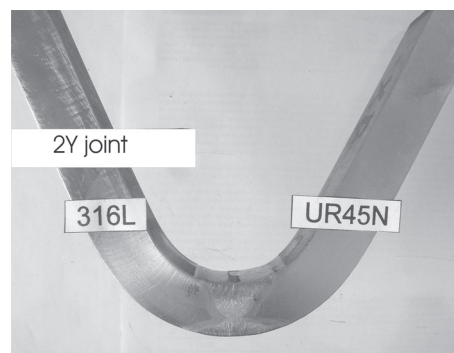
Bending test specimen. 2Y edge preparation weld
